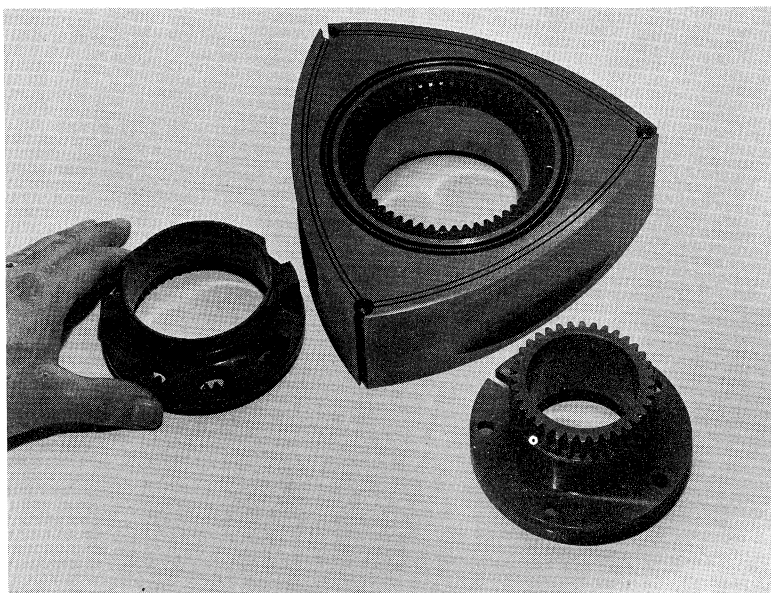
Experimental parts for Wankel rotary internal combustion engines. The triangular rotor has its internal gear bolted into a bored recess. The other internal and external gears are made in one piece.
